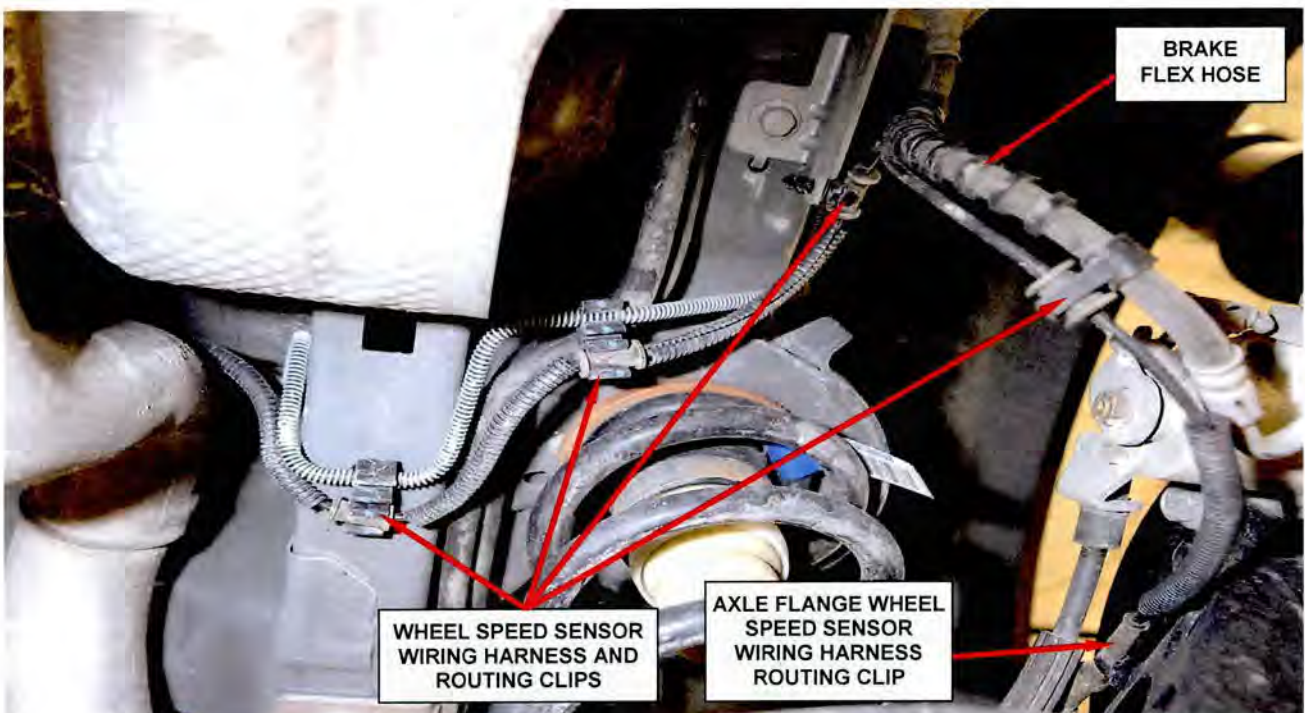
Wheel Speed Sensor Wiring Harness Routing Clips
